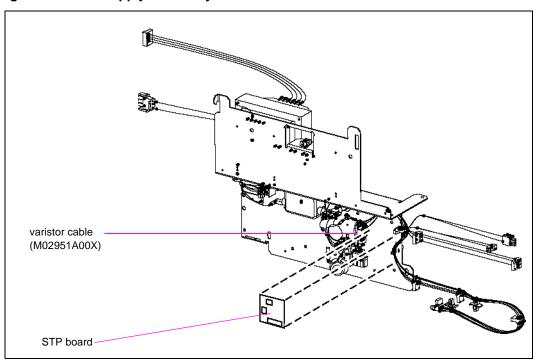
Power Supply Assembly M02274A001 - STP Board Location
